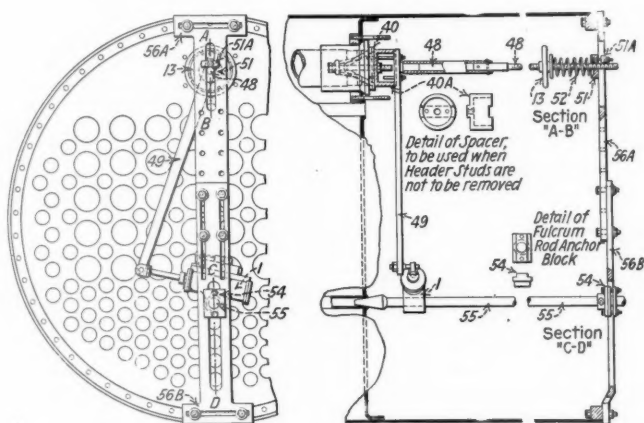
Arrangement for grinding dry-pipe flue-sheet joints
